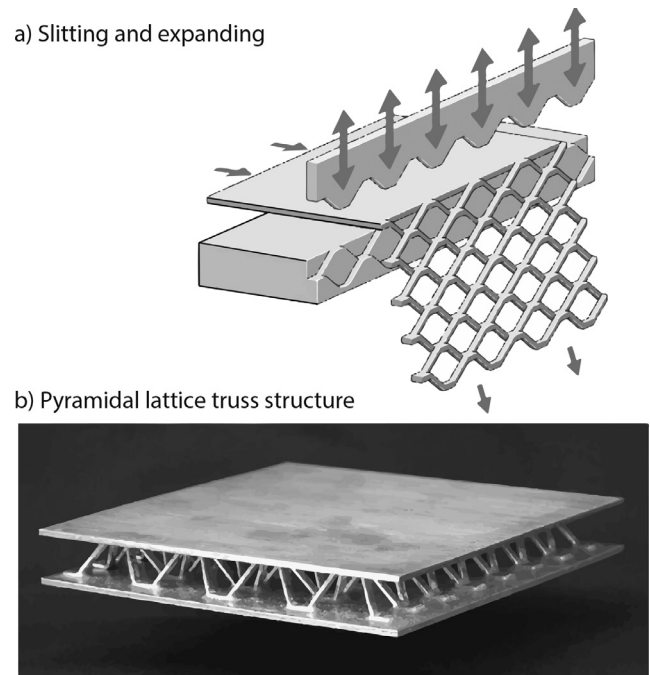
Expanded metal created by perforating and flattening sheet used to make a sandwich panel [210].
